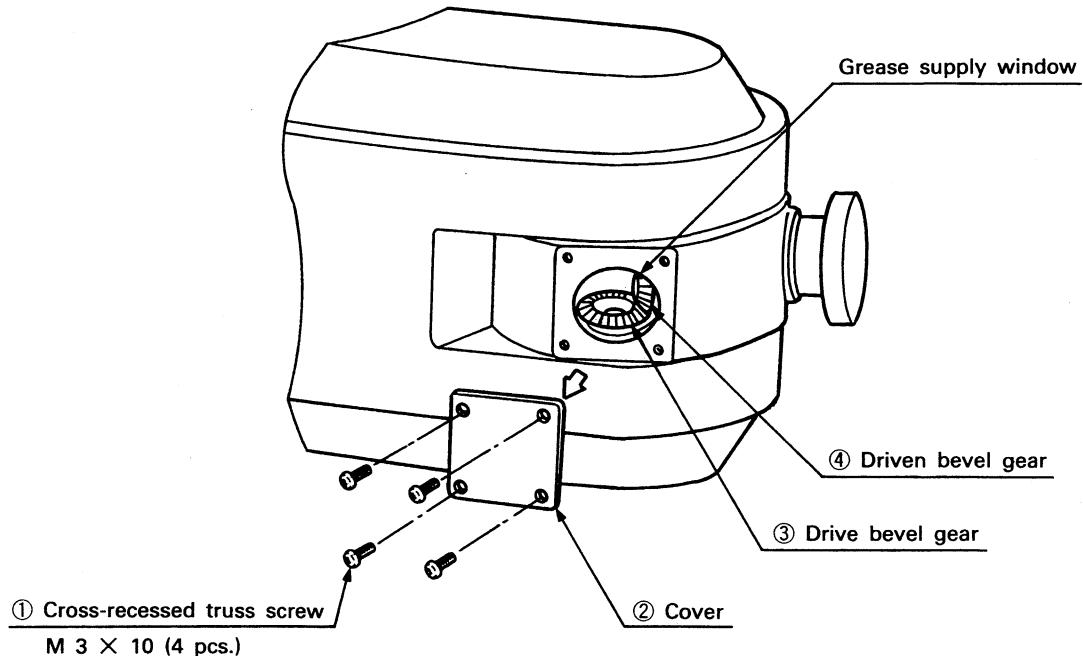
Supplying Grease to the Wrist Roll (J5 Axis) Drive Gears
